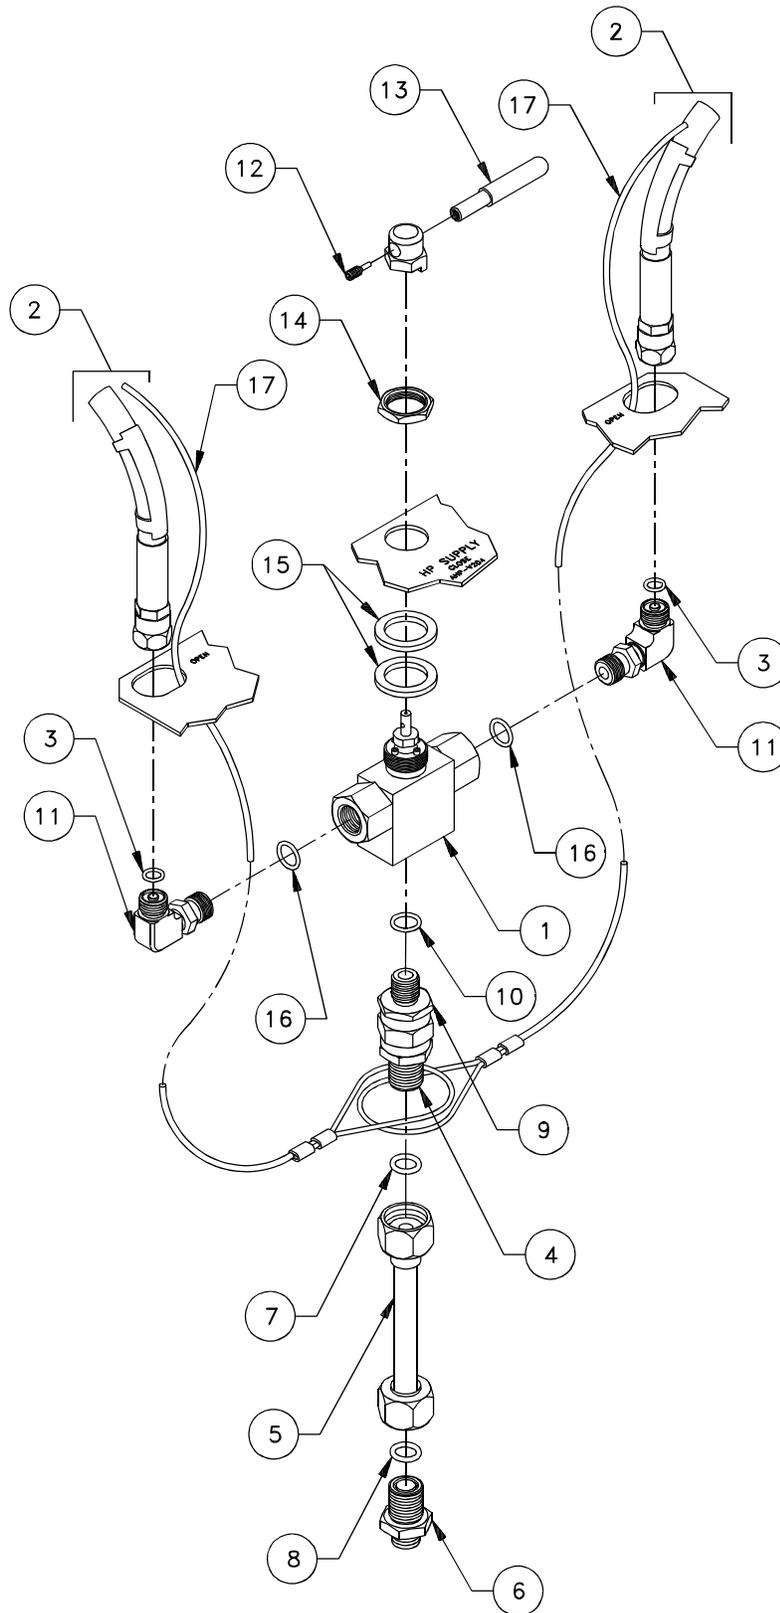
Three-Way Ball Valve (AHP-V204)
